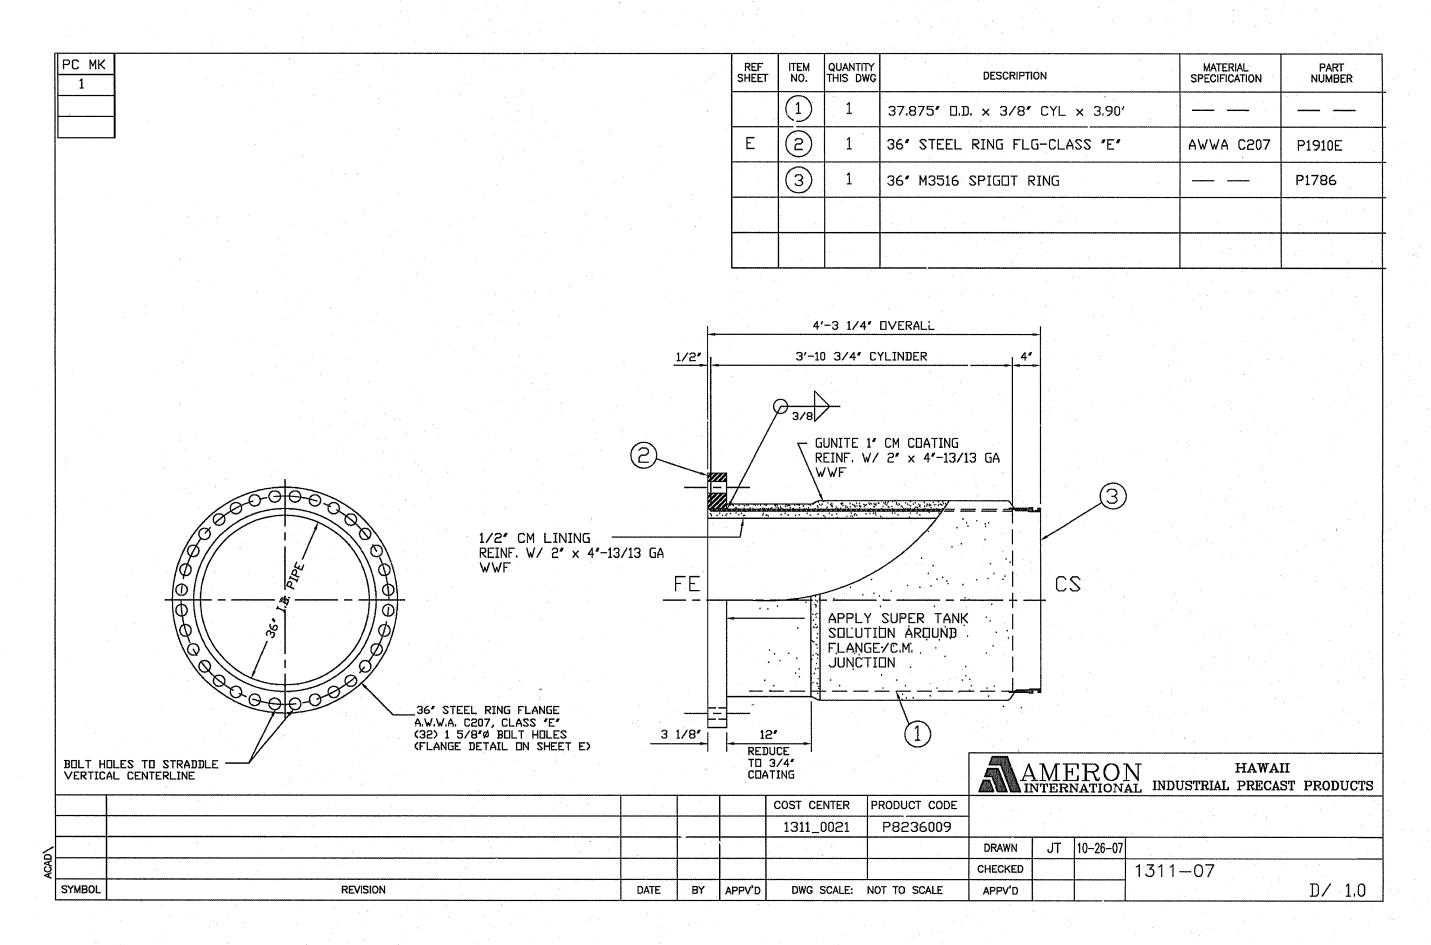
DETAILS OF FITTINGS AT TIE-IN TO EXISTING
